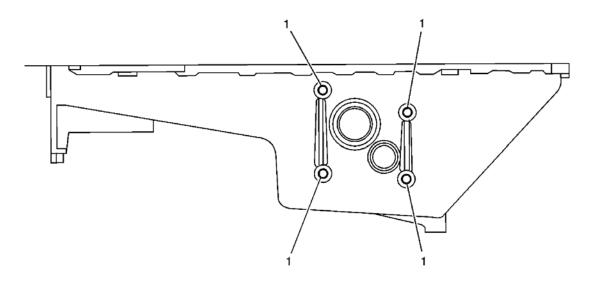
Oil Pan Thread Repair - Right Side View Courtesy of GENERAL MOTORS CORP.
